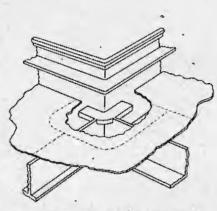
Outside view of hatch corner in upper deck of earlier Liberty ship shows original design including 51 pound doubler beneath deck and welding around insert plate.
